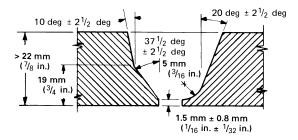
Typical Butt Weld End Preparation
